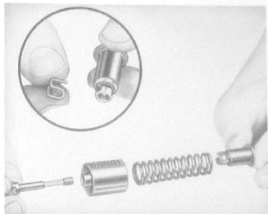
Assembling Speeder Rack and Balancing Spring—Composite View
